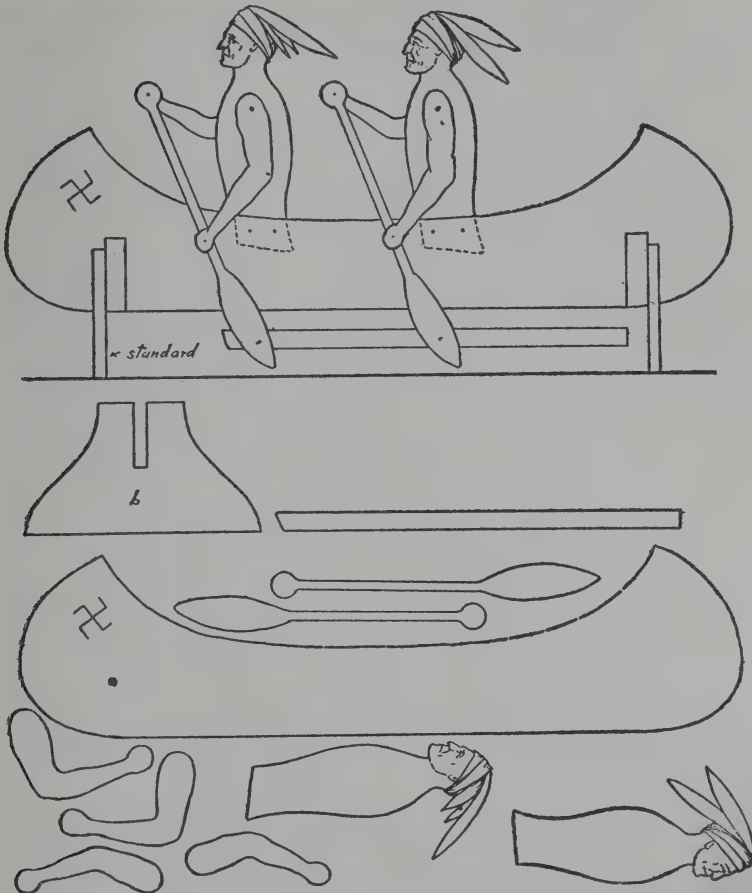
Indian paddlers. Separate parts cut out and assembled
